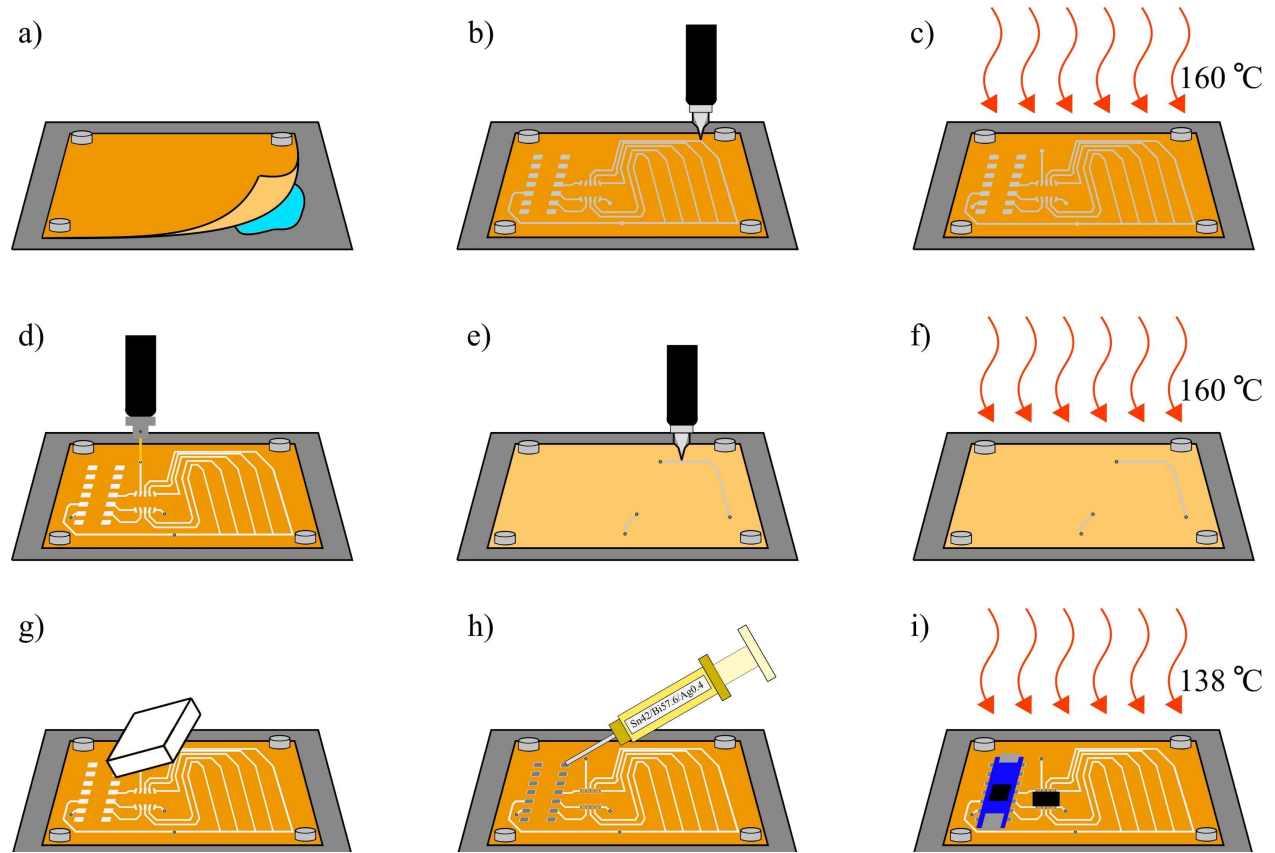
Double layer manufacturing process for one-dimensional PFHE sensor. From left to right: a) substrate plate adherence; b) front layer print; c) front layer thermal sintering; d) front layer via generation; e) back layer print; f) back layer thermal sintering; g) buffing; h) solder paste application; and i) solder reflow.
